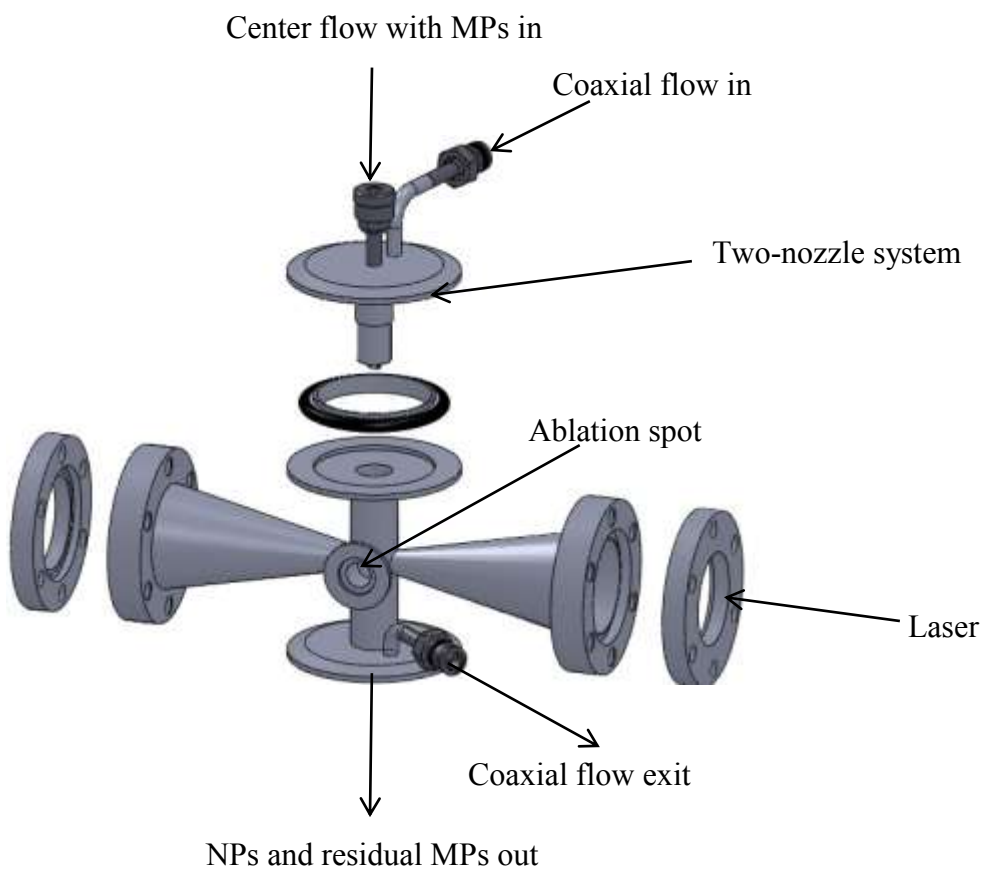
Drawing showing exploded view of the laser ablation cell (nozzle assembly and horn cell). Reprinted from Ref. 66.
